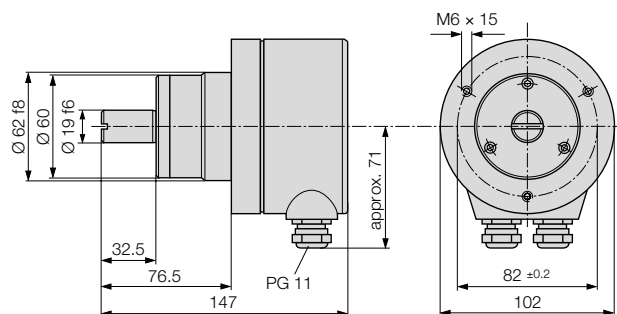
KINAX WT 707 with screw terminals and cable glands.
